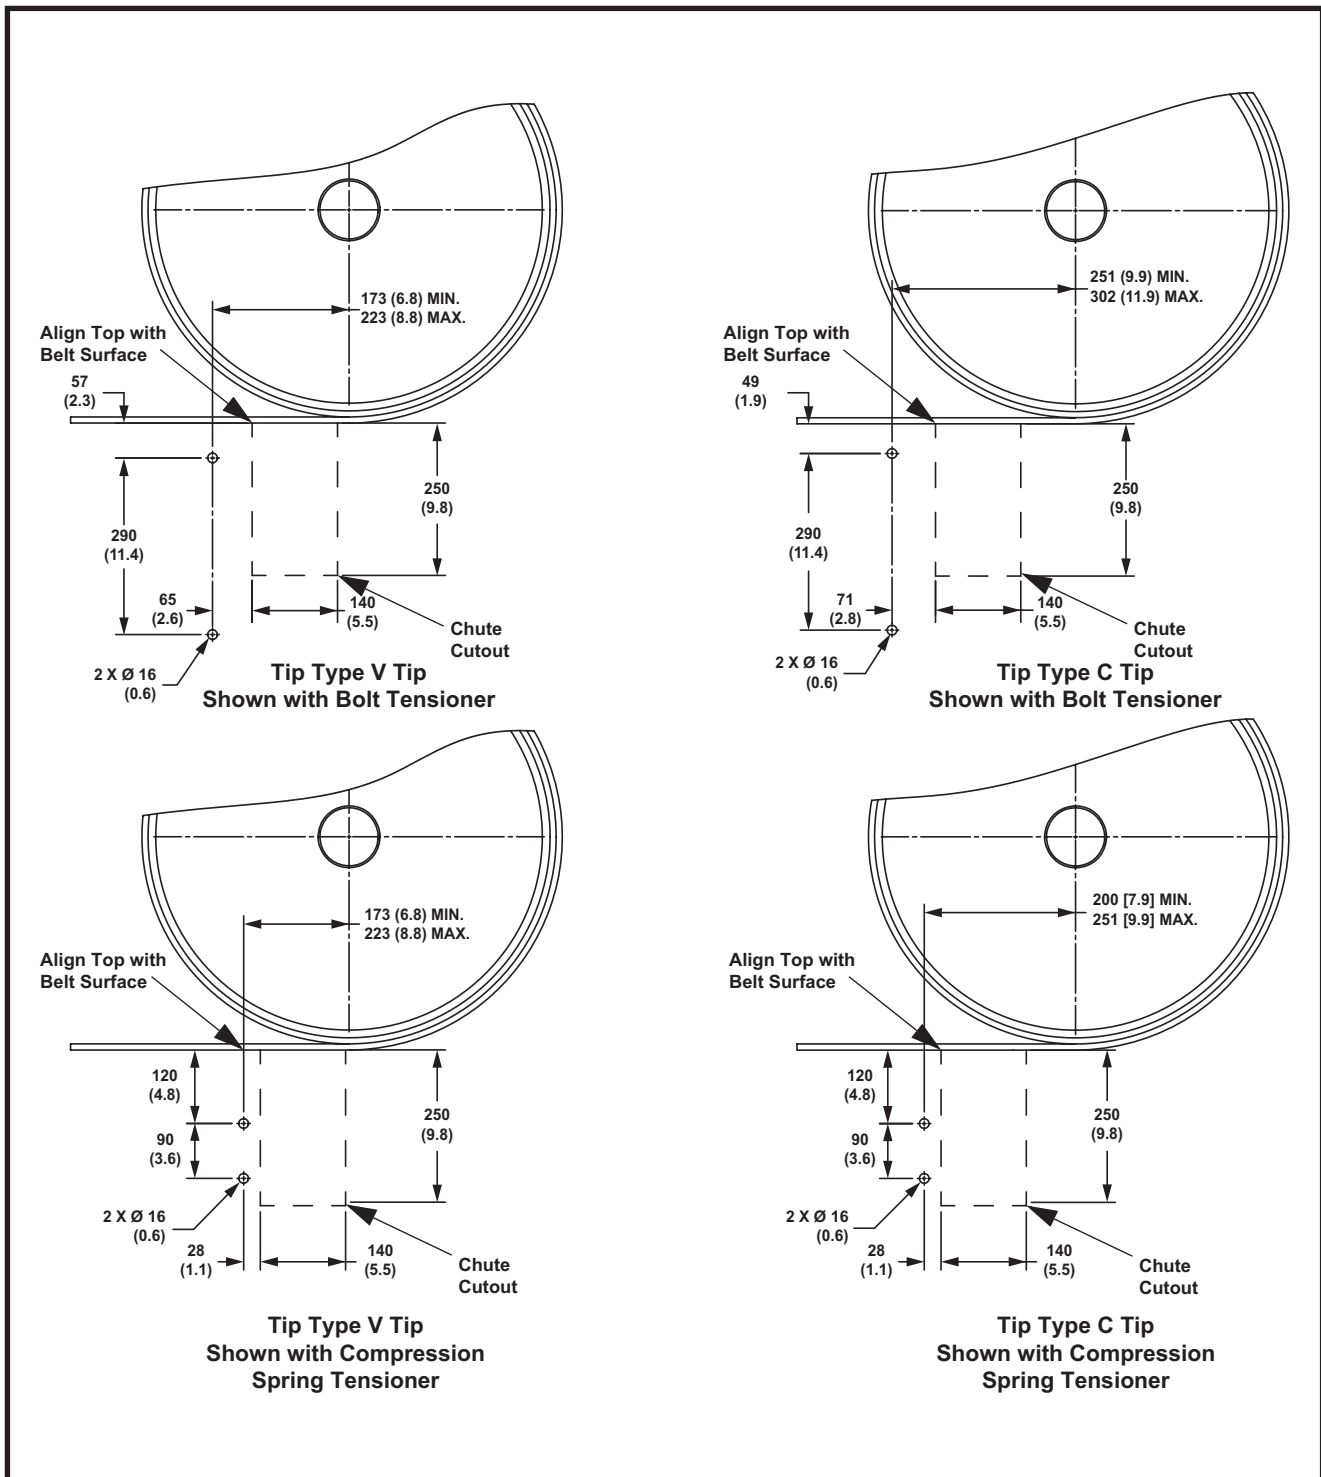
Martin® P2 Secondary Belt Cleaner HD Chute Cutout Locations
